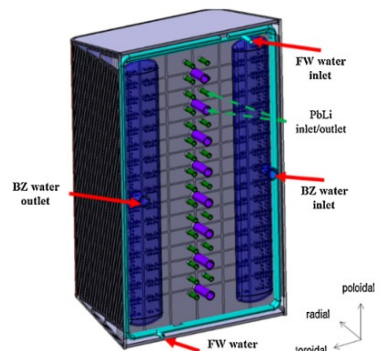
CAD of the rear side of the WCLL OB4 BM, showing the coolant I/O manifolds.
